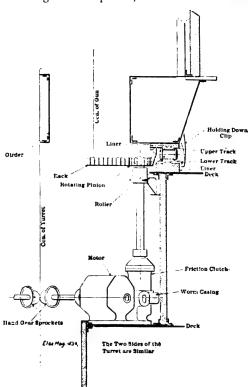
ELEVATION OF ELECTRIC TURRET TURNING GEAR.
